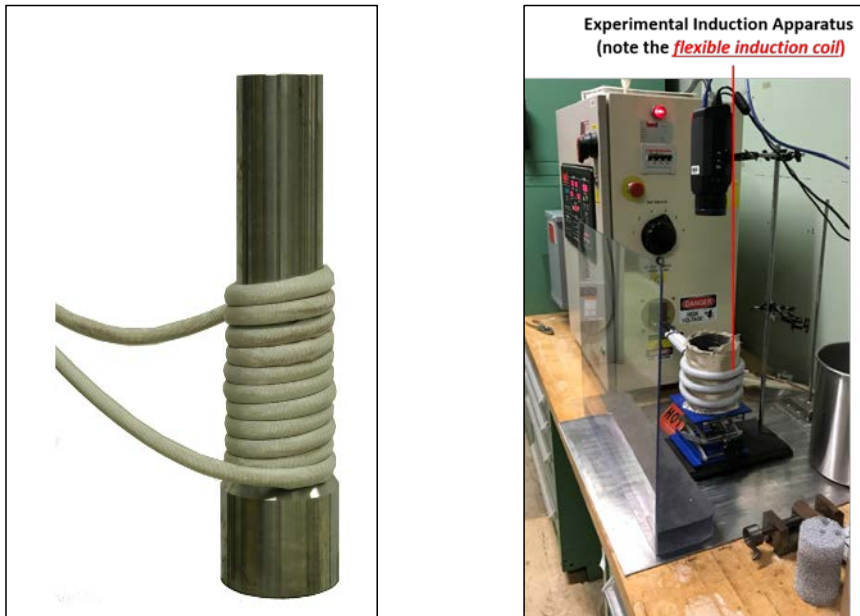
Left: Stock photo of a flexible induction coil that can be used to quickly set up a workpiece for induction heating. Image courtesy of Ambrell.com. Right: A typical induction heating experiment using the flexible coil to heat a metal cylinder workpiece. Fiberglass insulation is placed between the cylinder and the induction coil to protect the coil from the heat of the metal.
